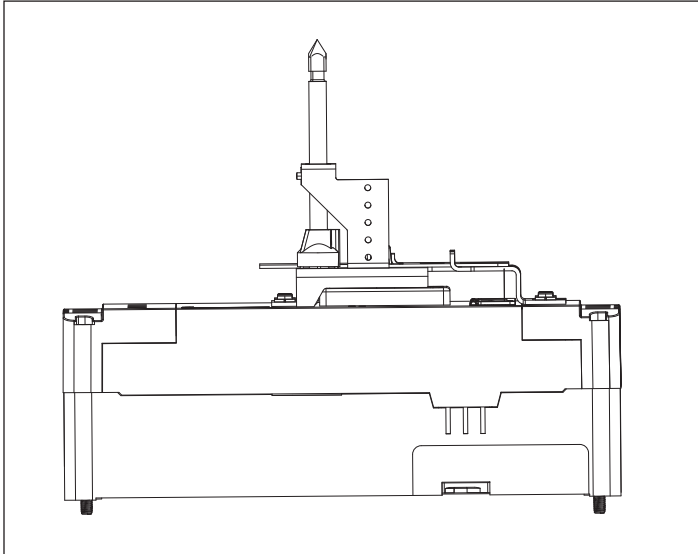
Cutting the Shaft to Length and Collar to Shaft.
